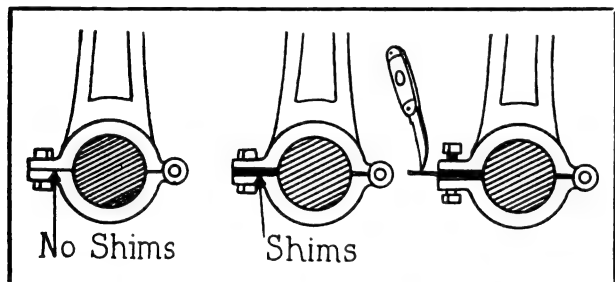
A Connecting Rod Without Shims, a Bearing Rigidly Shimmed, and the Manner of Removing Shims with a Pocket Knife.
